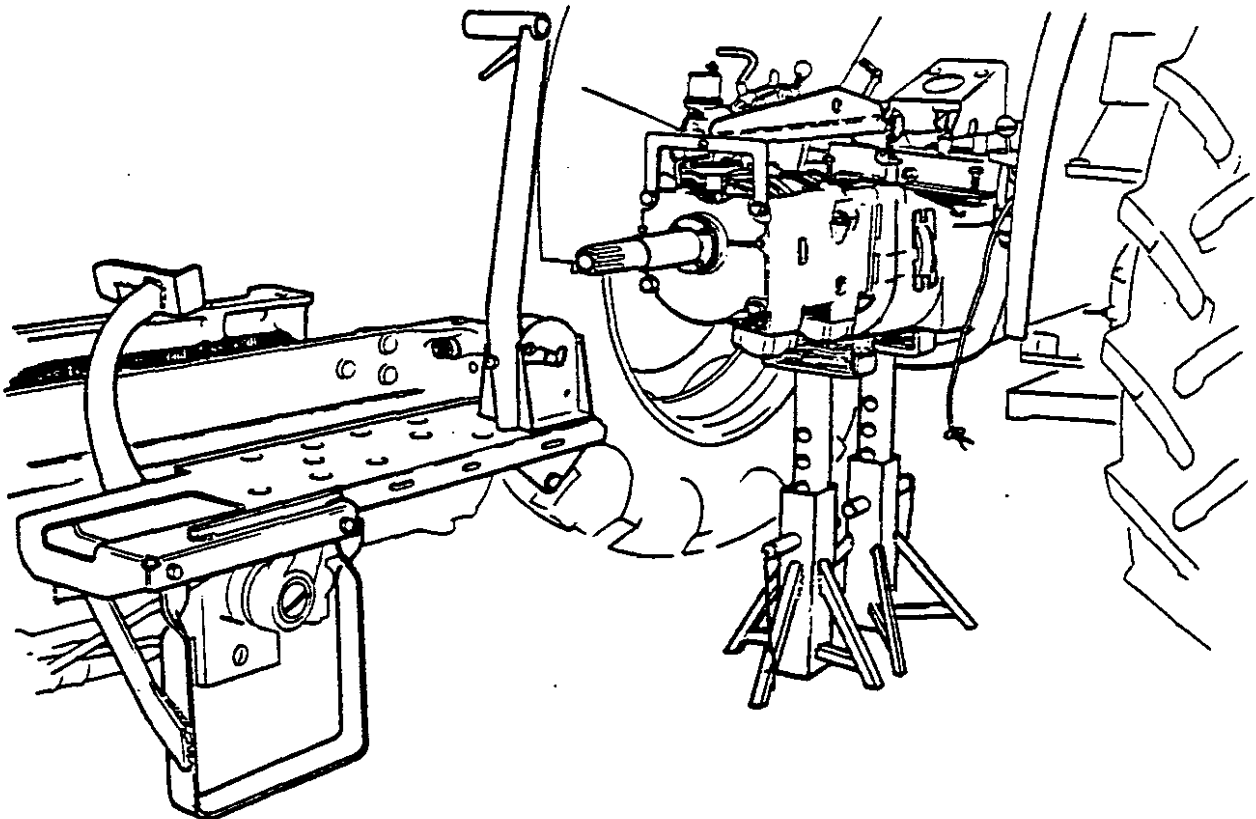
TRACTOR 'SPLIT' FOR GEARBOX REMOVAL
